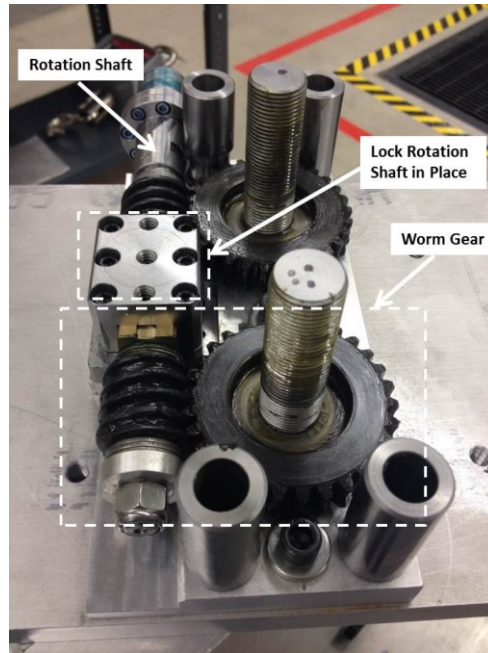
Installation of rotation shaft and the worm gears at the base plate.
